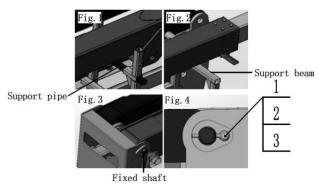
Assembling the boom assembly 1. Latch 2. Bolt 3. Washer
